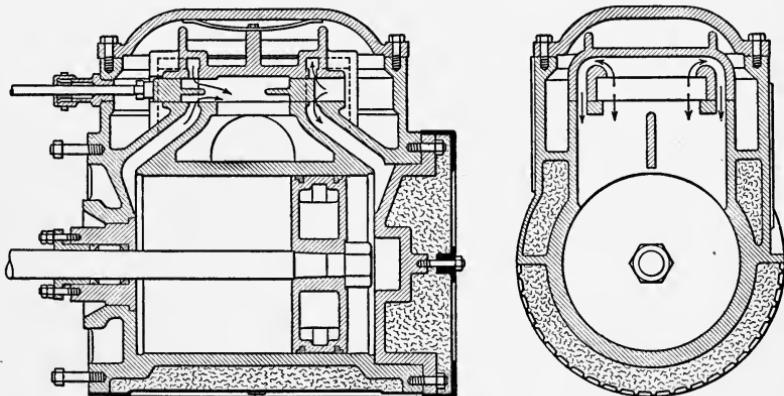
Cylinder, Valve Chest and Valve of Ridgway Engine.
